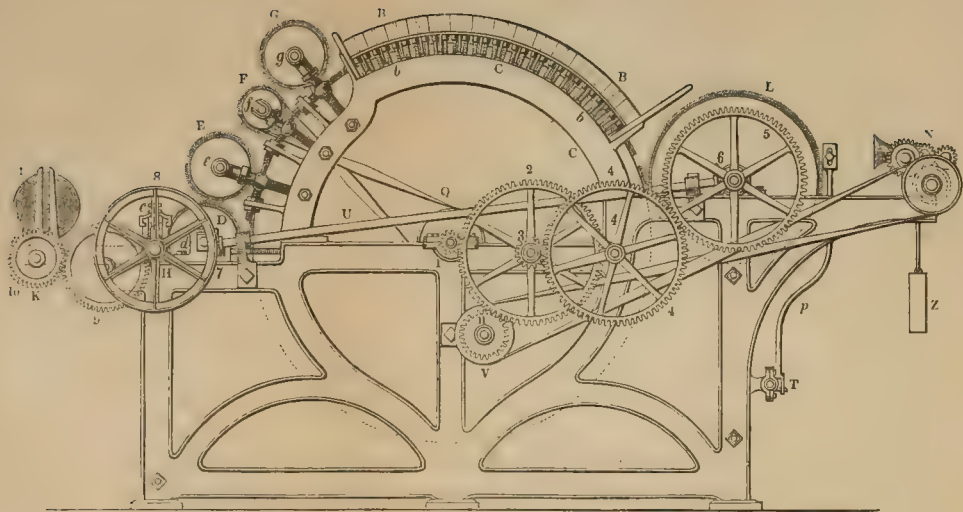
Carding Engine. Exterior, or side view. Scale, three-fourths of an inch to the foot. To face page 28.
